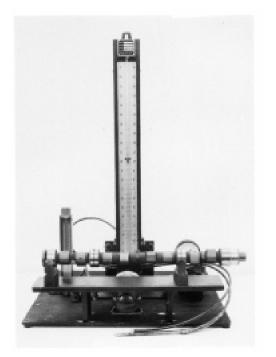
Typical Camshaft Lobe Flow Rating Apparatus
